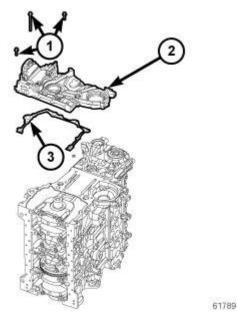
FRONT COVER AND GASKET Courtesy of CHRYSLER LLC
